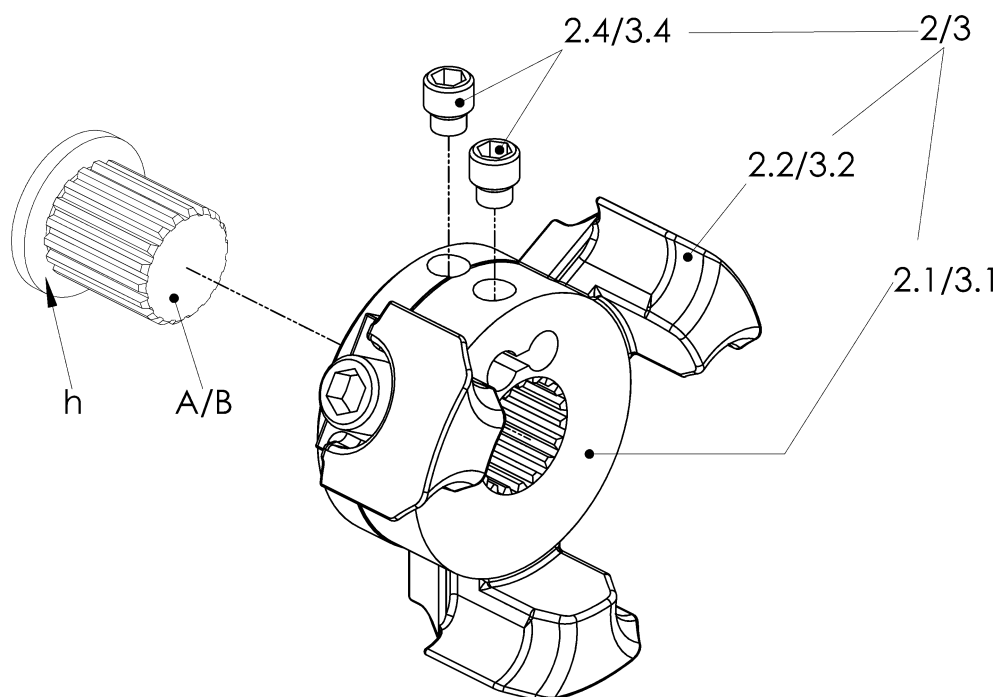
Mounting the hub assembly (2/3) with CENTALOC clamping
